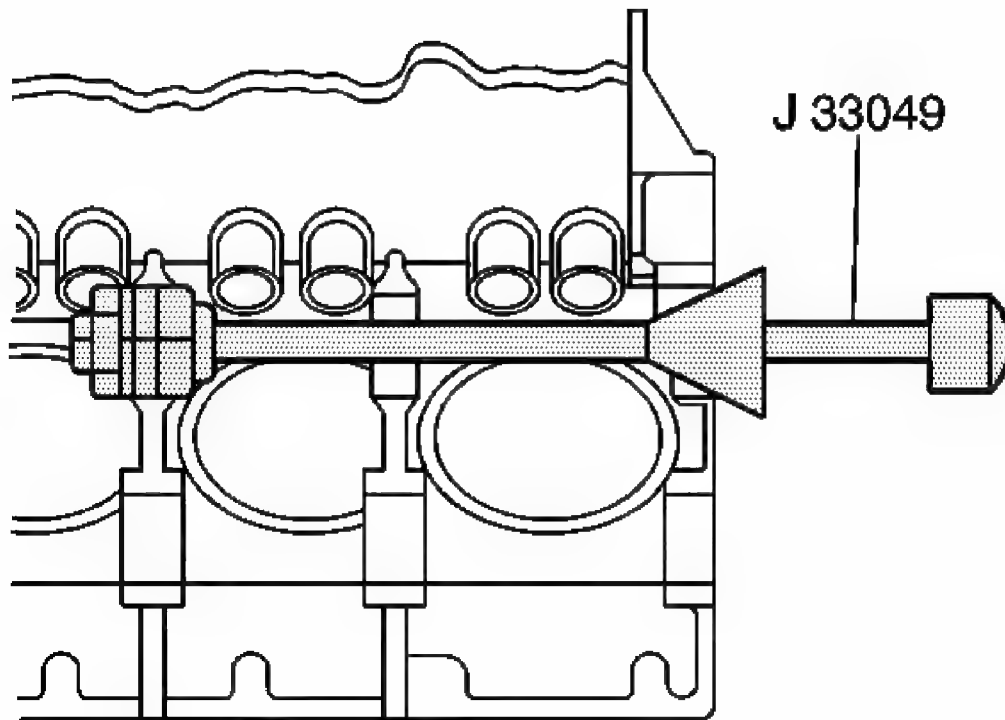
Removing/Installation Camshaft Inner Bearing Using J 33049
